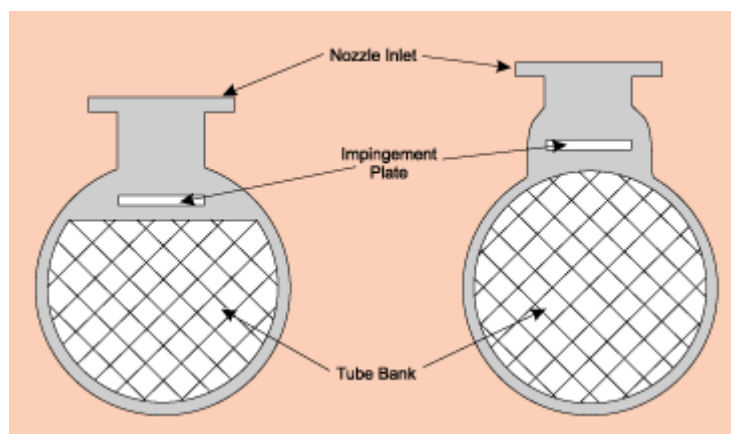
Nozzle Impingement Plate Tube-Side Channel and Nozzles
